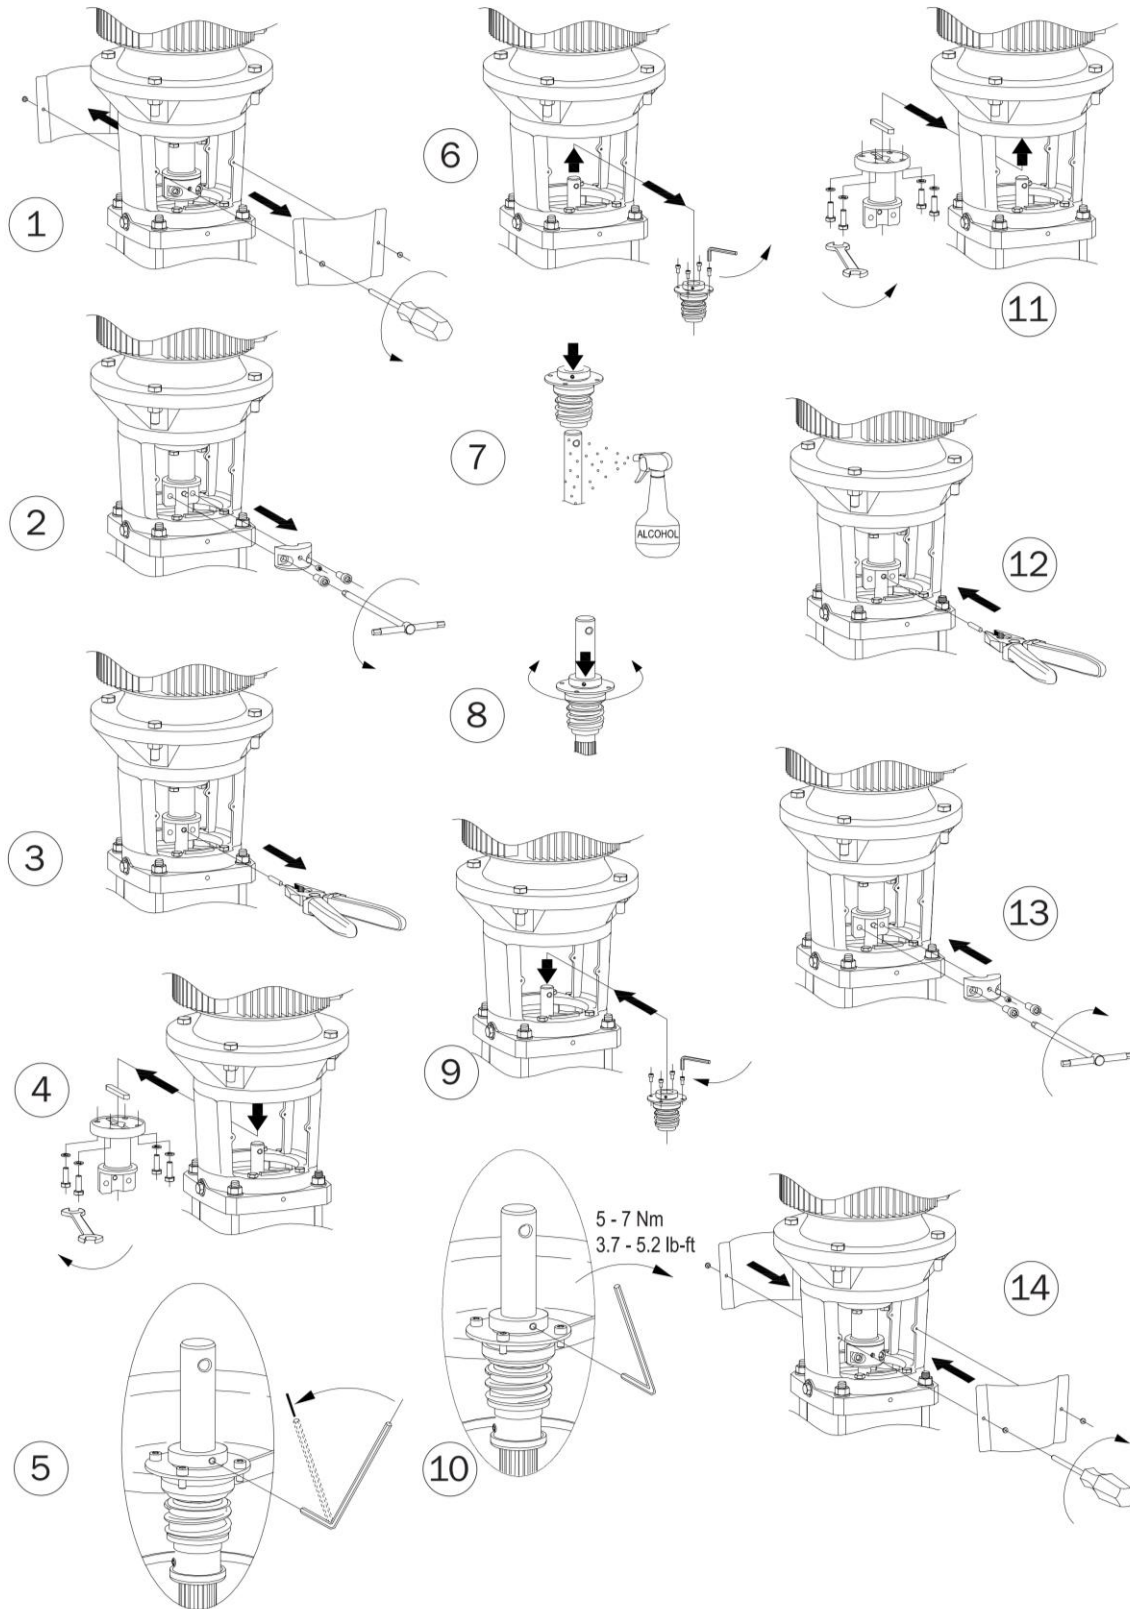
Replacement of Shaft Seal RSV 32-45-64 with Bearing [-C-]
